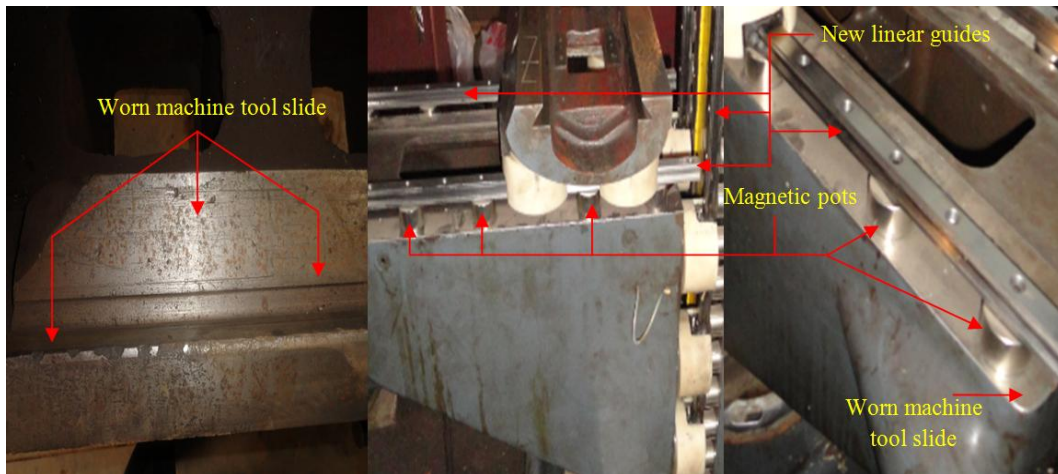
Substitution of worn machine tool slides by new linear guides of ball carriages by application of magnetic pots assembly
